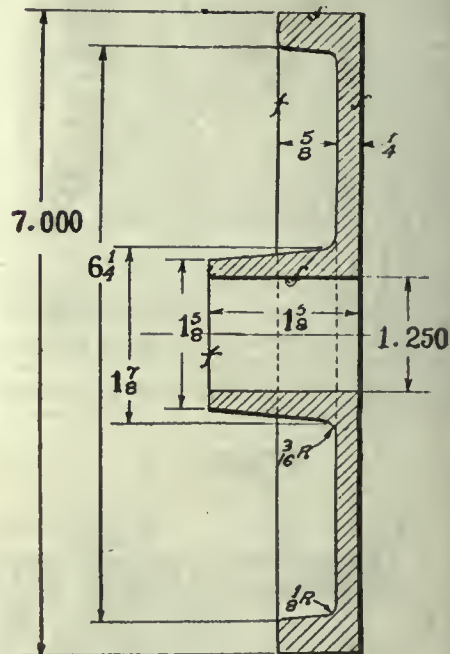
COMPLETE CONSTRUCTION SHOWN IN SECTION.
